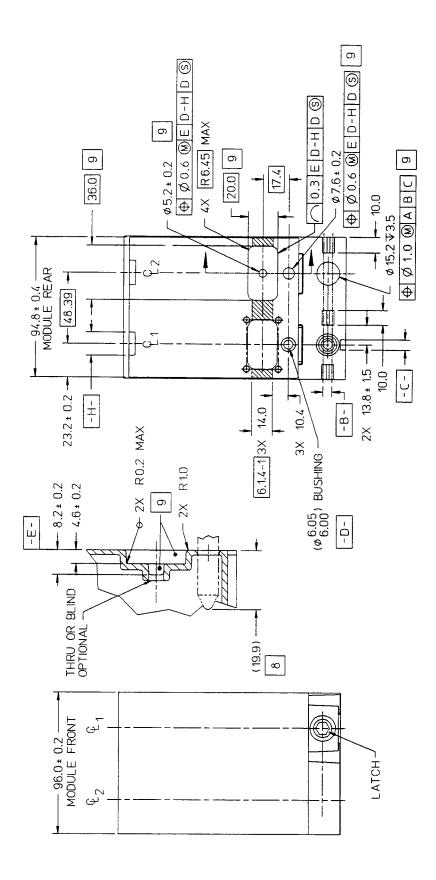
2 SLOT MODULE FRONT & REAR DETAILS
